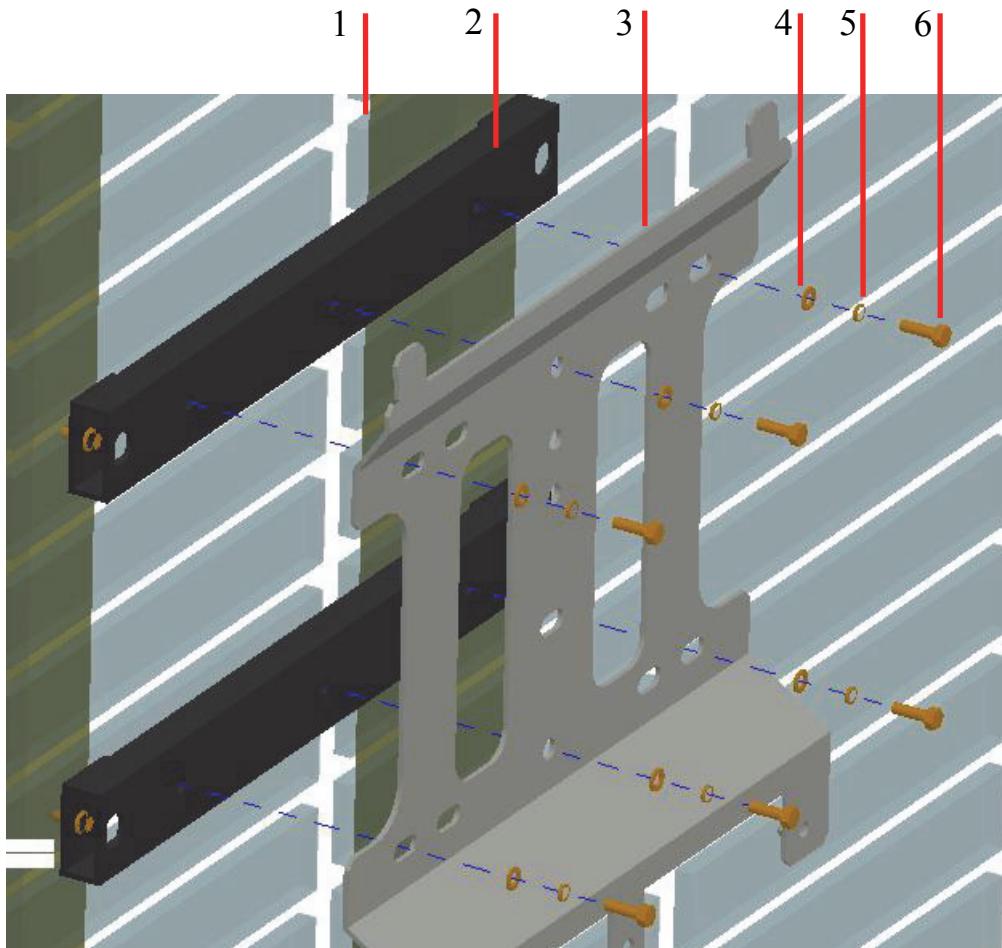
Fasten the Bracket against Masonry Wall with Expansion Screws
